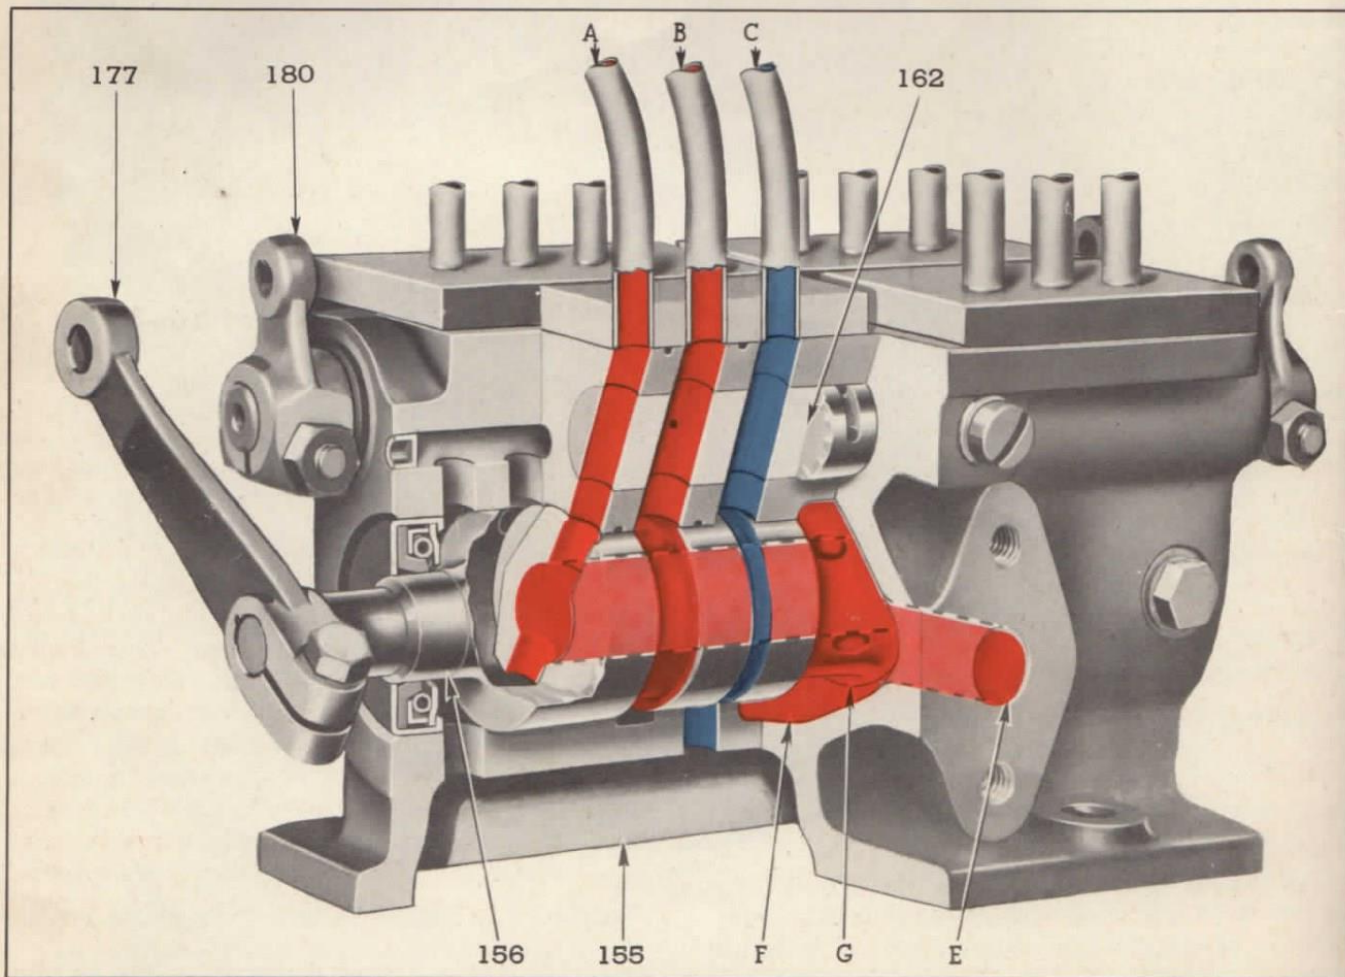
Position of Selector and Shut-Off; Also Oil Flow Through Twin or Quad Control Valve for Forward Drive
